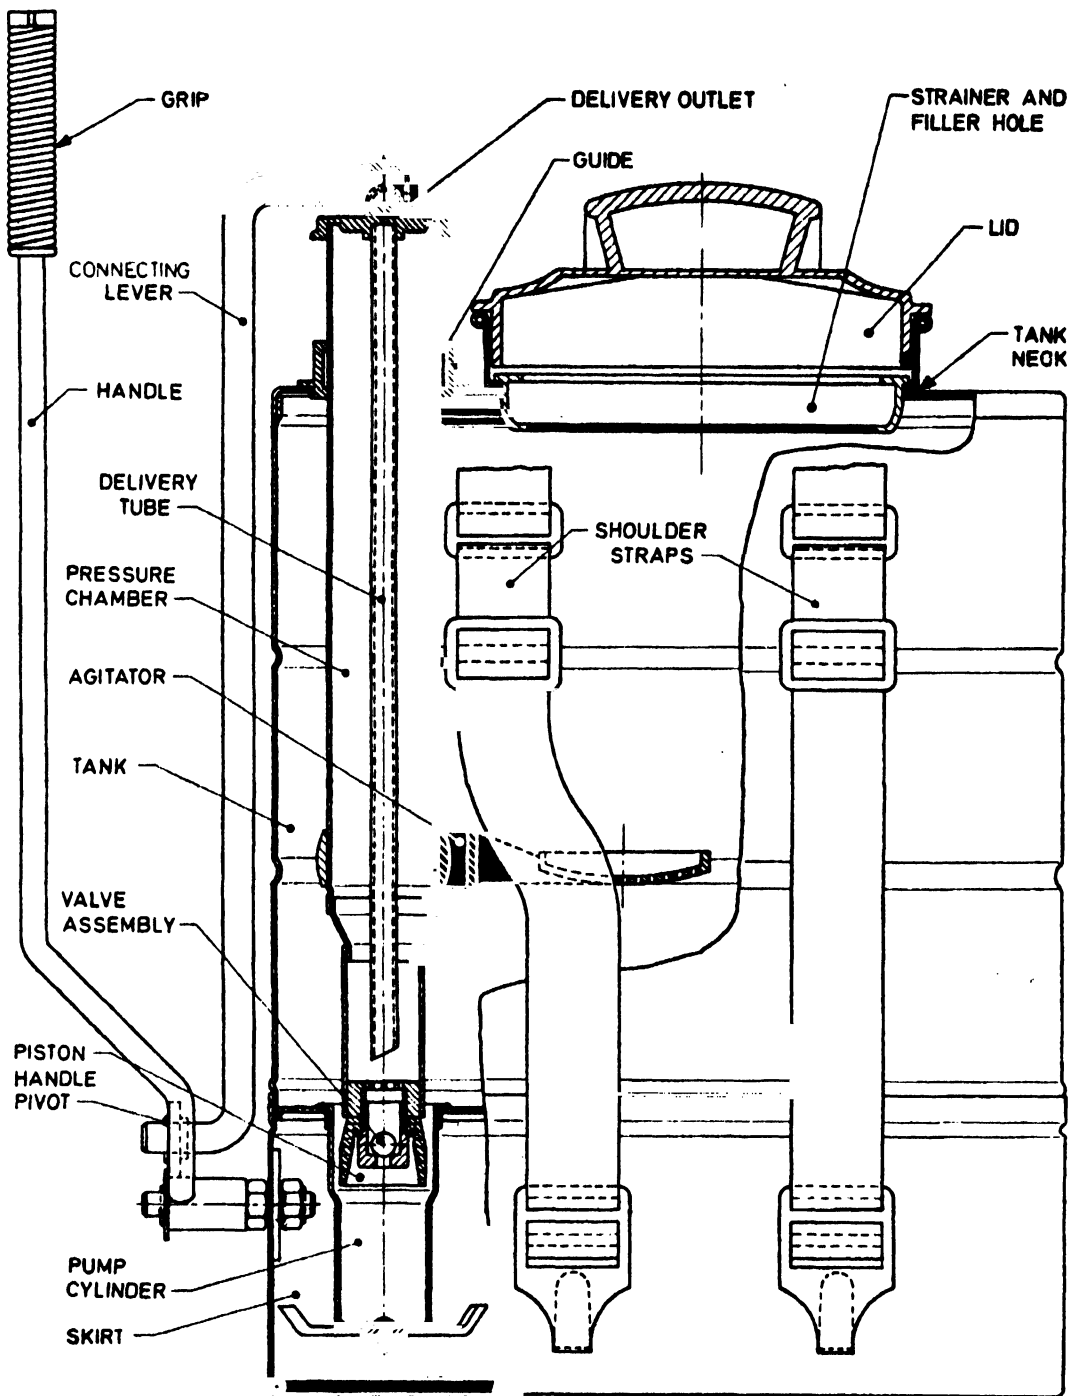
KNAPSACK SPRAYER, PUMP ASSEMBLY INSIDE TANK
